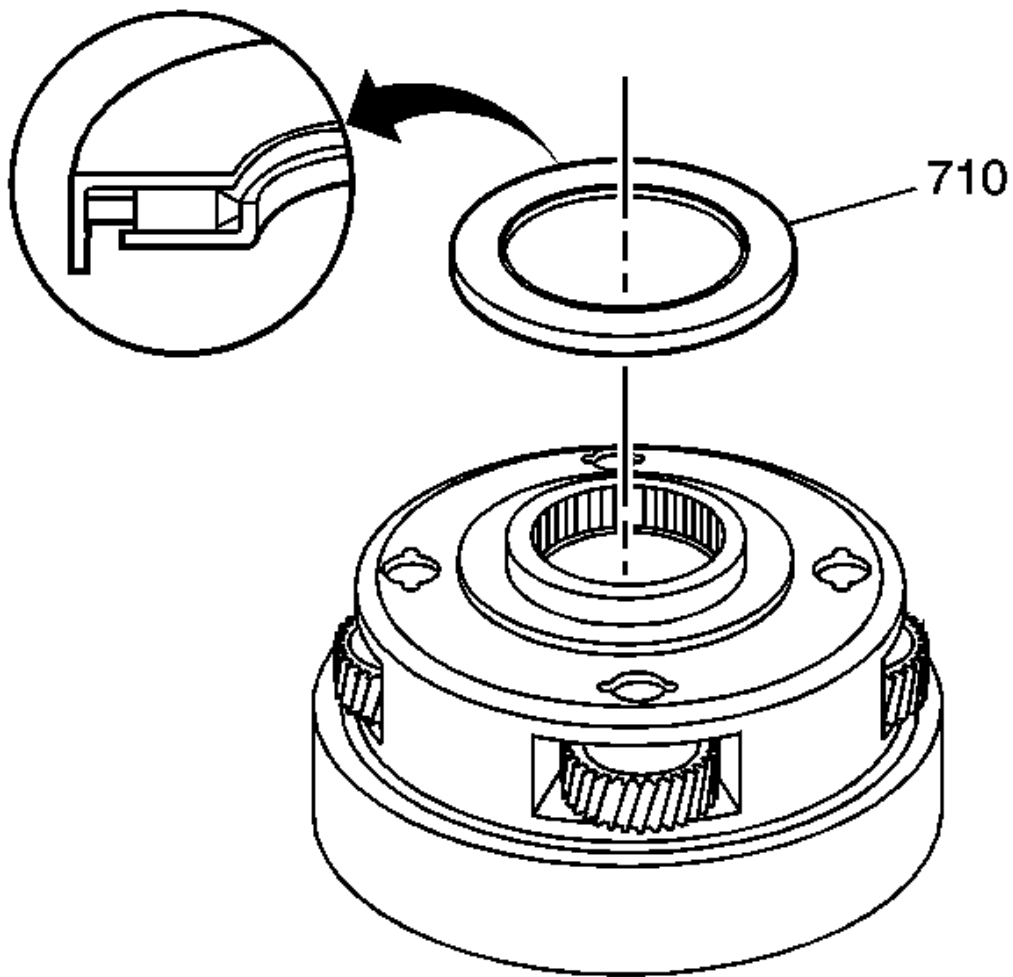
Identifying Input Carrier & Reaction Internal Gear Assembly Thrust Bearing
